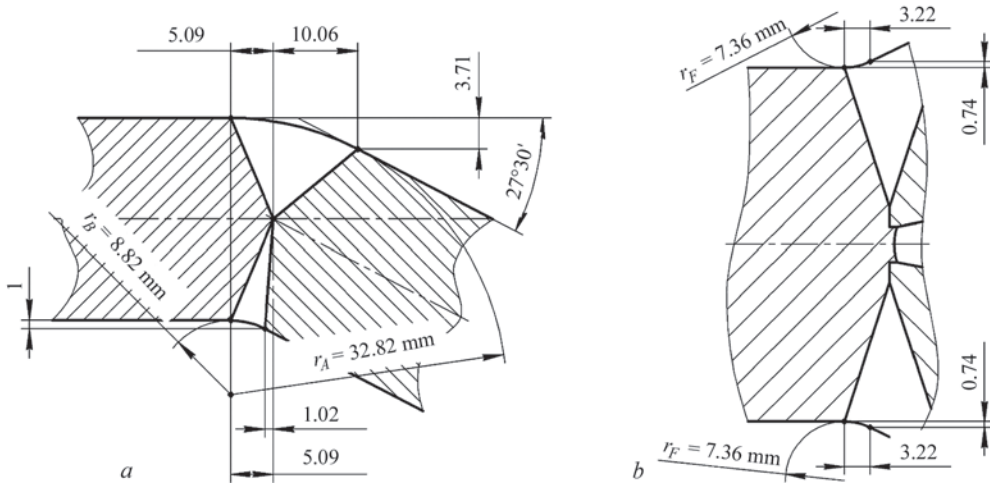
Dimensions in conjugation zone for the first (a) and second (b) variants of performance of welded disk of smoke exhauster impeller
